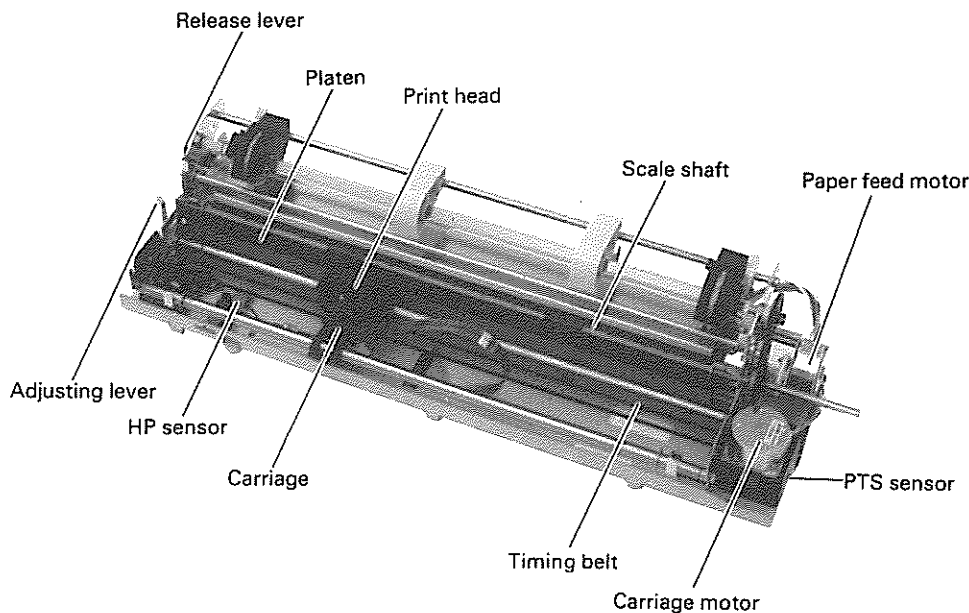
Exterior View of Model-3560 Printer Mechanism (FX-100+/FX-185/105)
